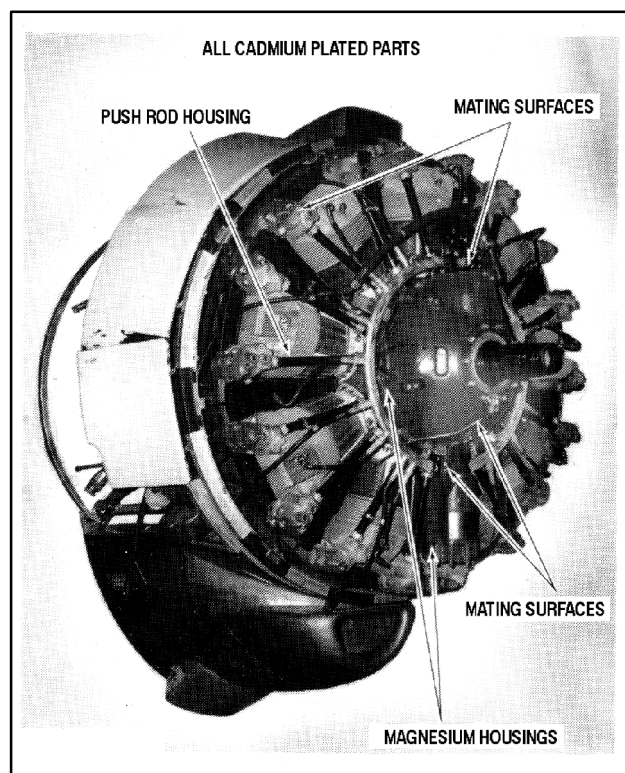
Reciprocating Engine Frontal Area Corrosion Points
